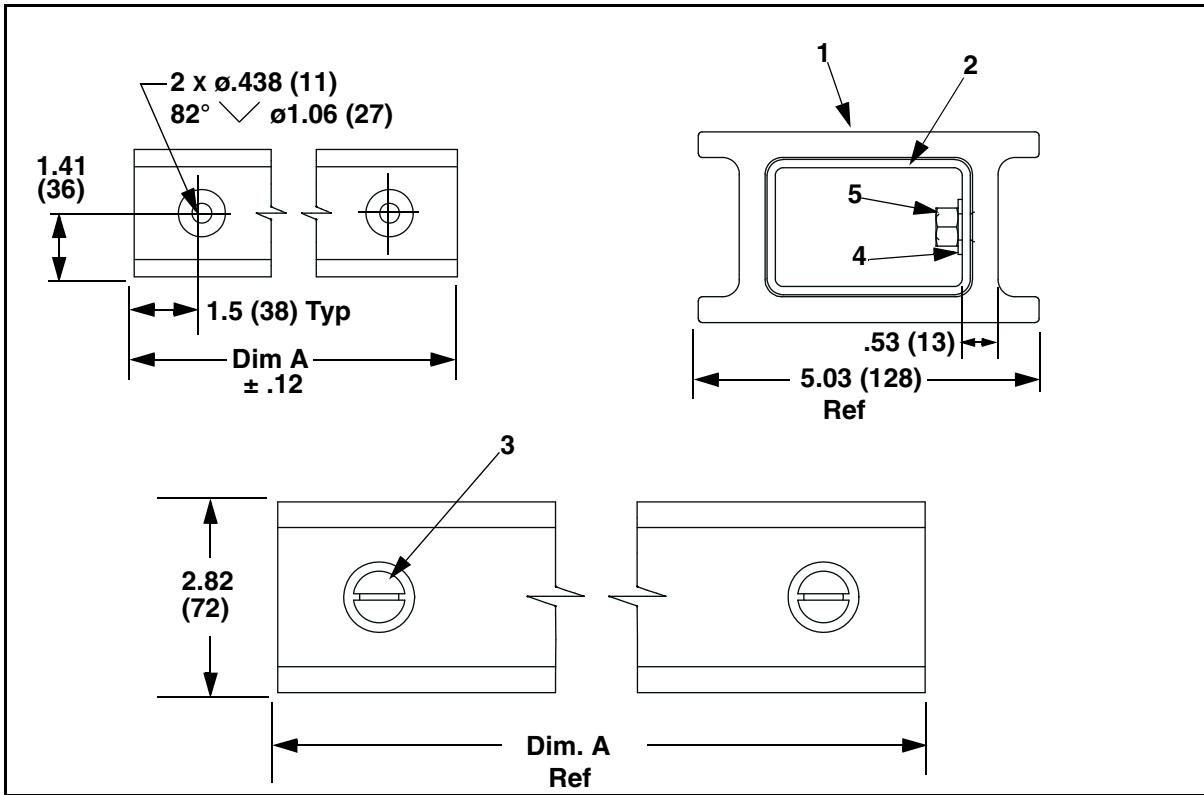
Martin® Idler Slider Bar Assembly, P/N 37135-BXX
